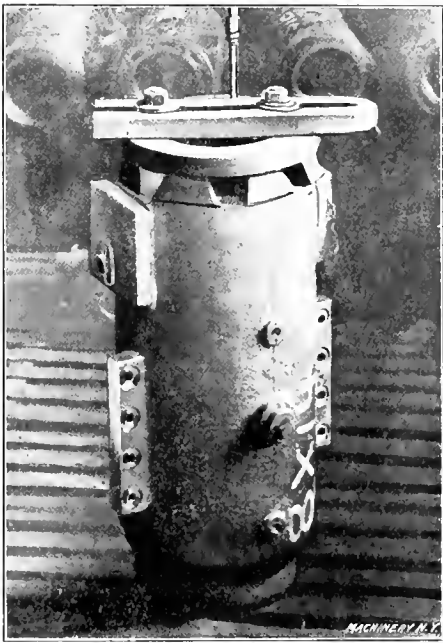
The Final Cold Water Test of the Finished Cylinder
